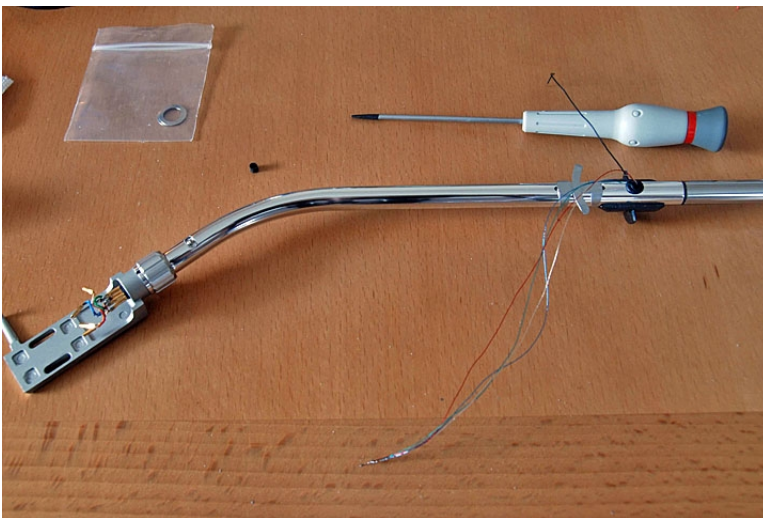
New inner wire fitted and headshell socket aligned.
